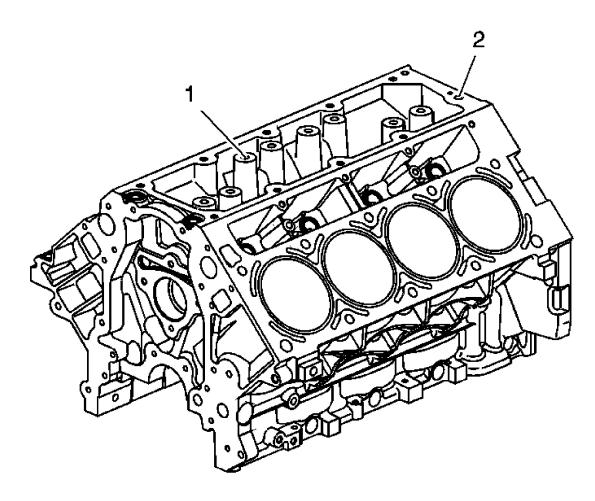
DOD Engine Block Courtesy of GENERAL MOTORS CORP.
